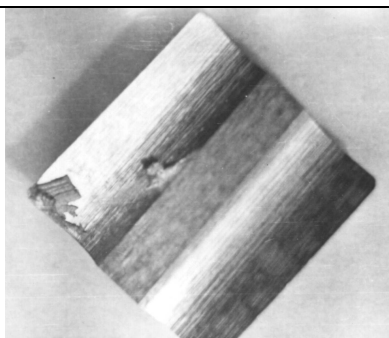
Deposition on cutting edge after cut with $v = 180\text{m/min}$
